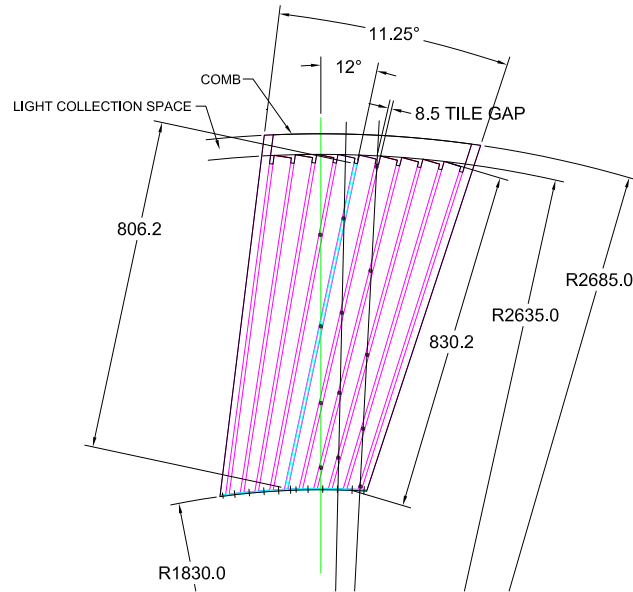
Transverse cutaway view of an Outer HCal module, showing the tilted tapered absorber plates. Light collection and cabling is on the outer radius at the top of the drawing.
